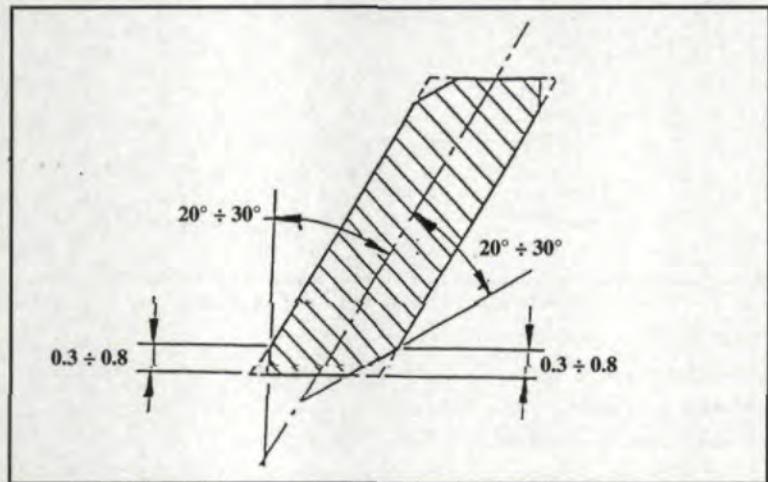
Chamfer angles must be set with exposed points as far away from the ends of the tooth as possible.
